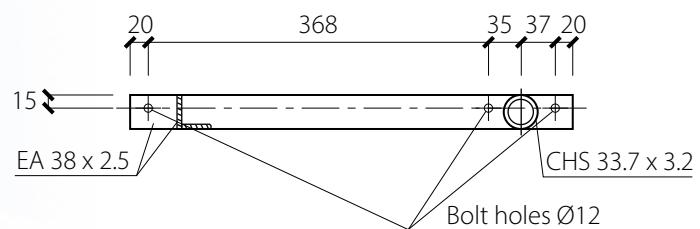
Front view of lower right metal bracket for type 5 special truss-out bamboo scaffold
